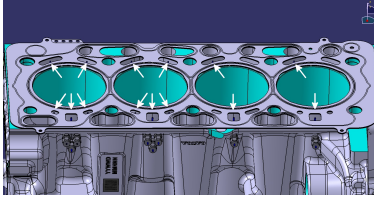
Thermocouple positions in cylinder head cooling channels, exhaust side view.
